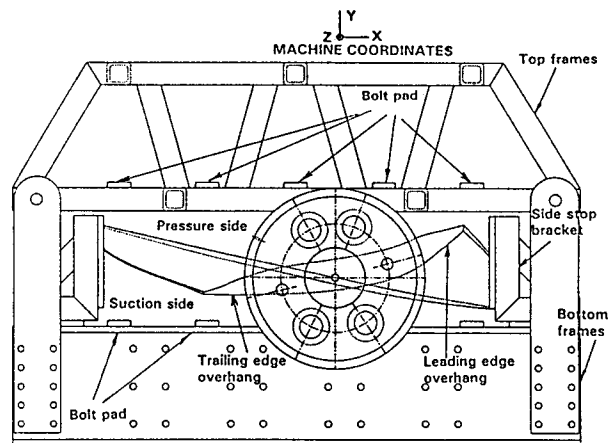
TRUNNION MACHINING FIXTURE (front view)
